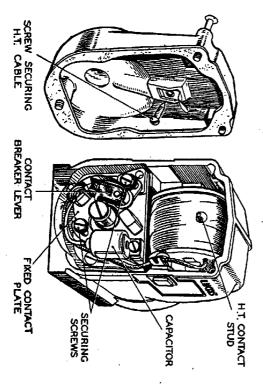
Arrangement of Rotating-magnet Contact-Breaker.
